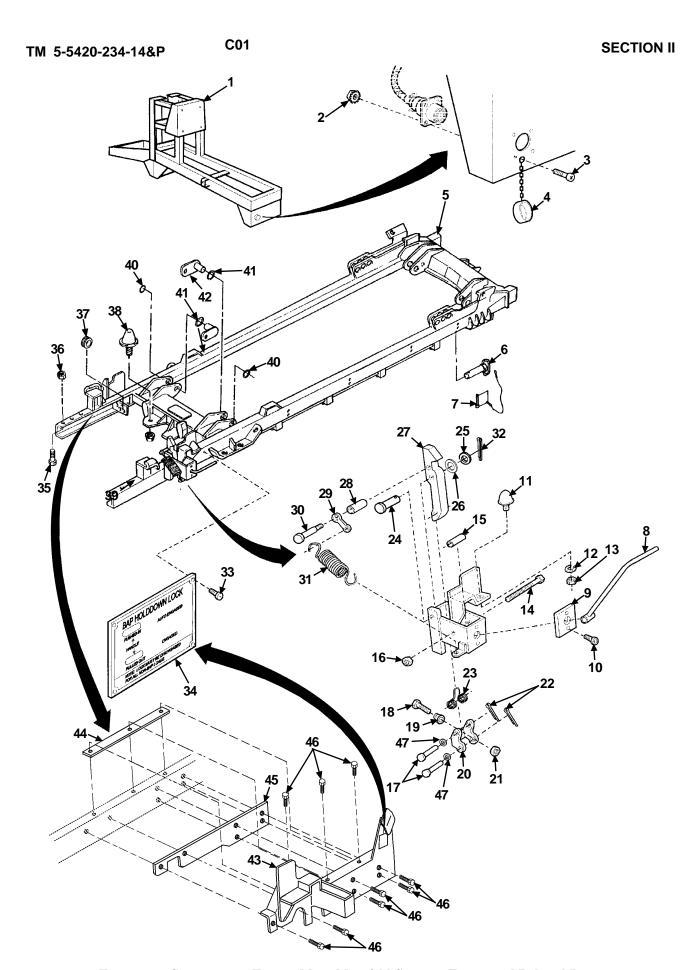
Compression Frame, Main Manifold Support Frame and Related Parts
